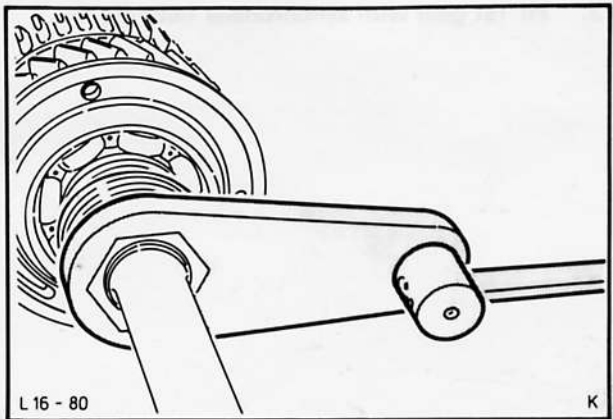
Torque nut to specified value with Special Tool No. 16-027
